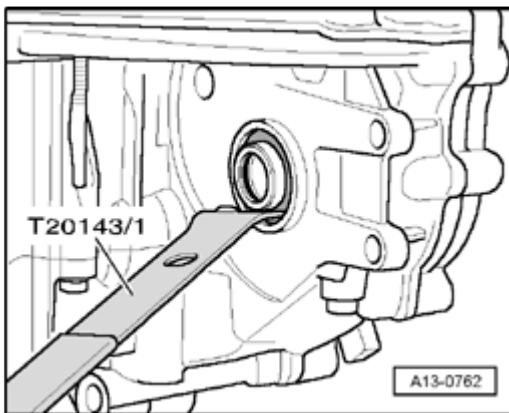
Prying Seal Out With Pry Lever T20143/1
